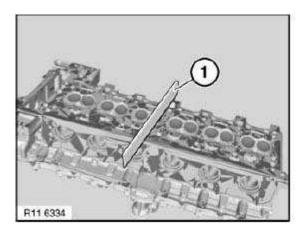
Identifying Cylinder Head Sealing Faces Courtesy of BMW OF NORTH AMERICA, INC.
